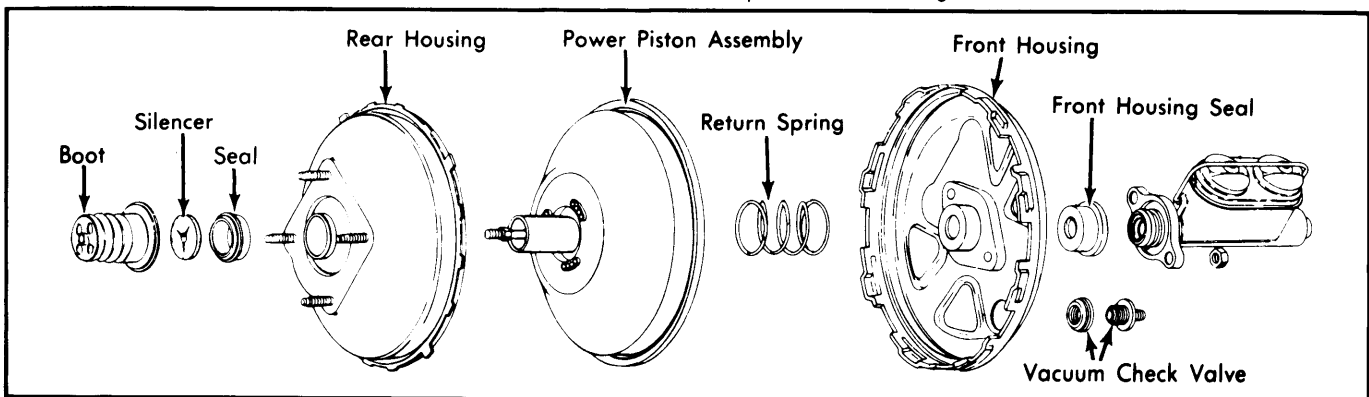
Exploded View of Delco-Moraine Single Diaphragm Power Unit
